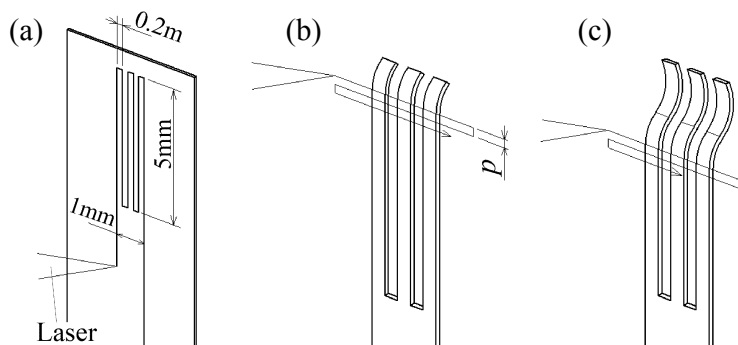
Combined process for both direction bending: (a) Cutting; (b) Irradiation on front side; (c) Reversing and irradiation on backside.
